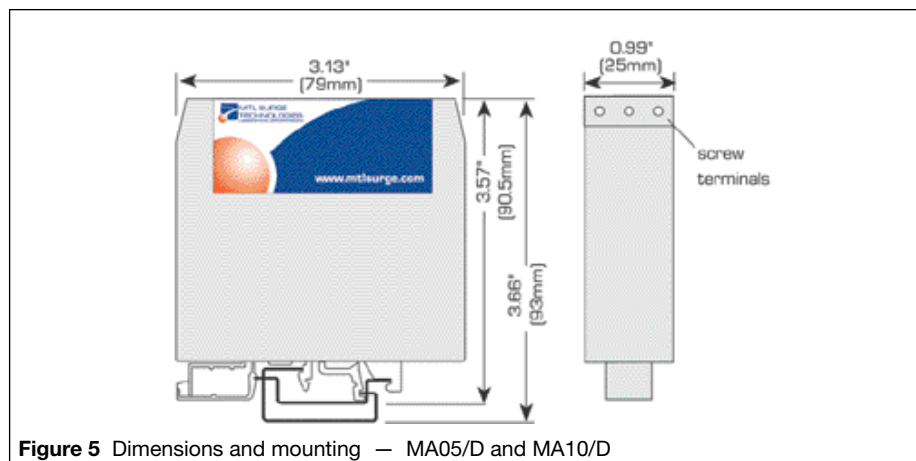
Dimensions and mounting — MA05/D and MA10/D
